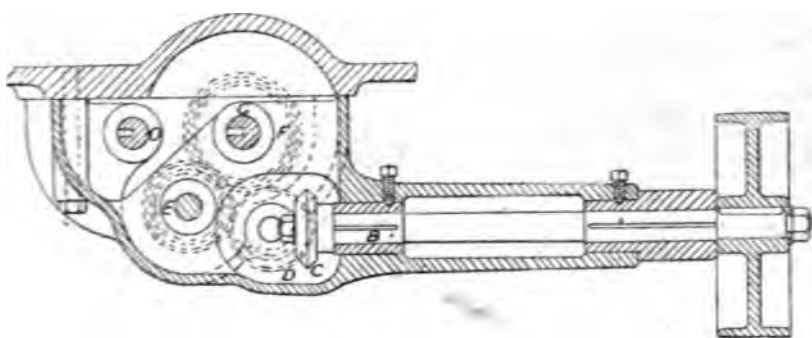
Feed Box Details. Section on Driving Shaft.
